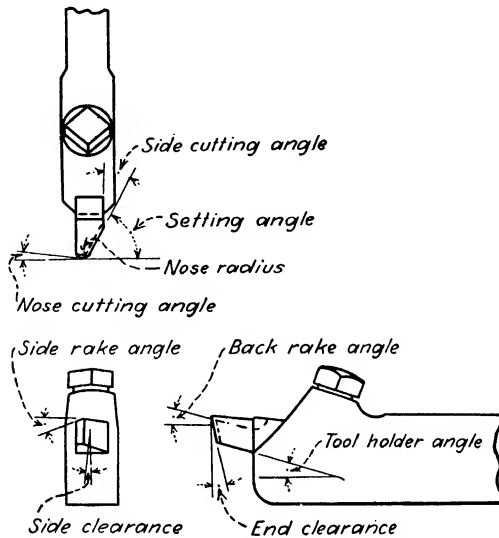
A tool bit and holder with nomenclature. The bit should be ground while held in the holder.
